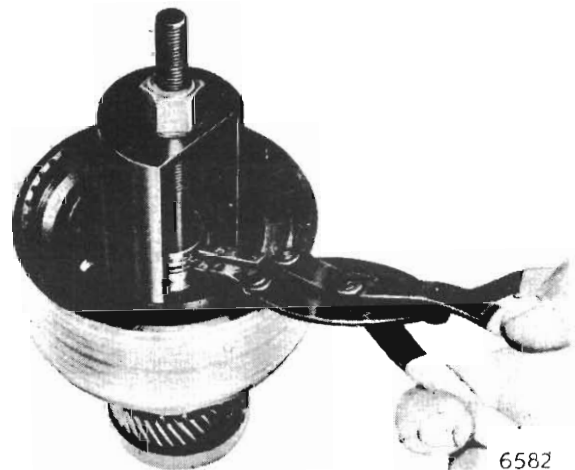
Removing spring retaining snap ring showing Tool E1386 installed
